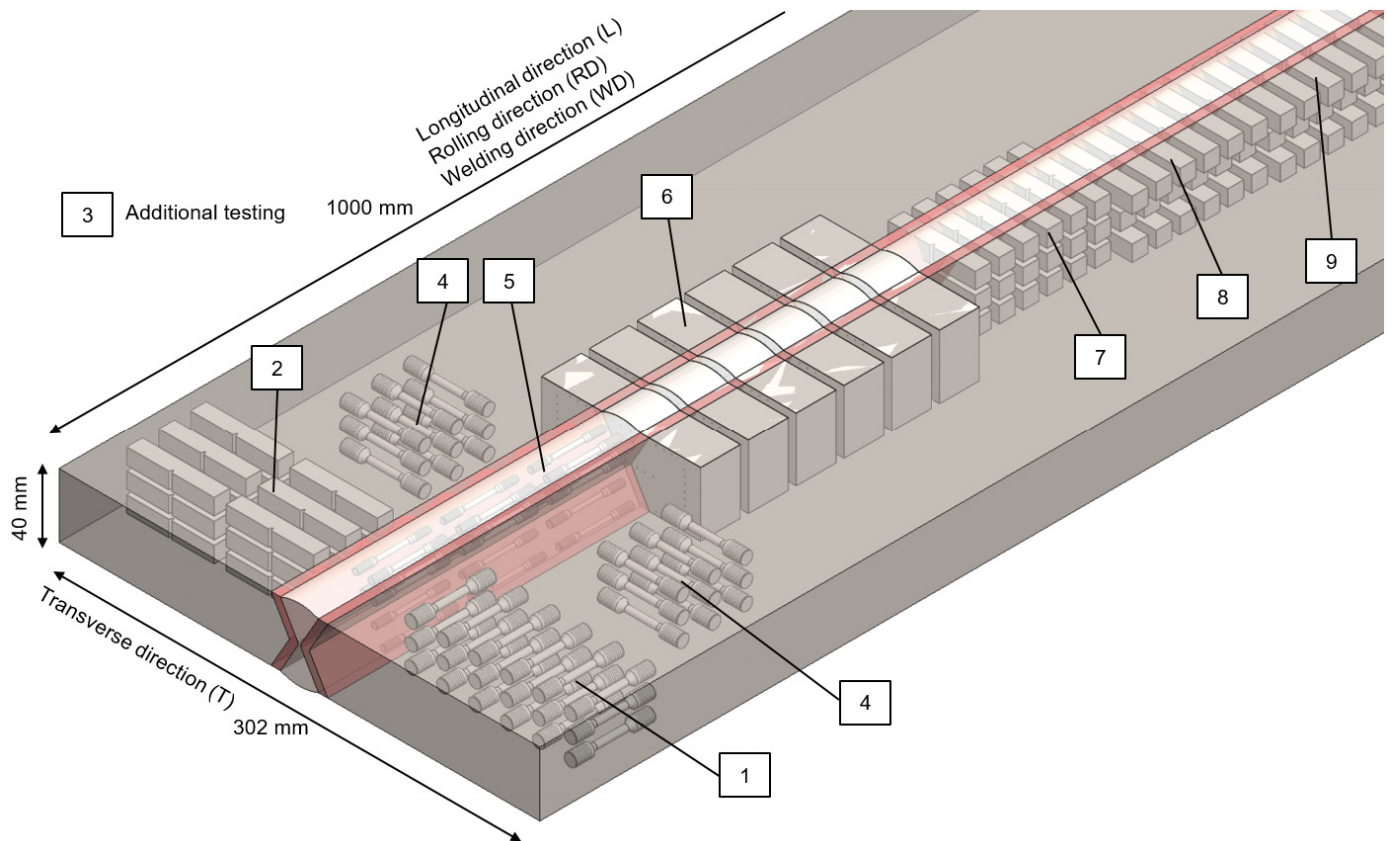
Welded test coupon with disposition of test specimens.
